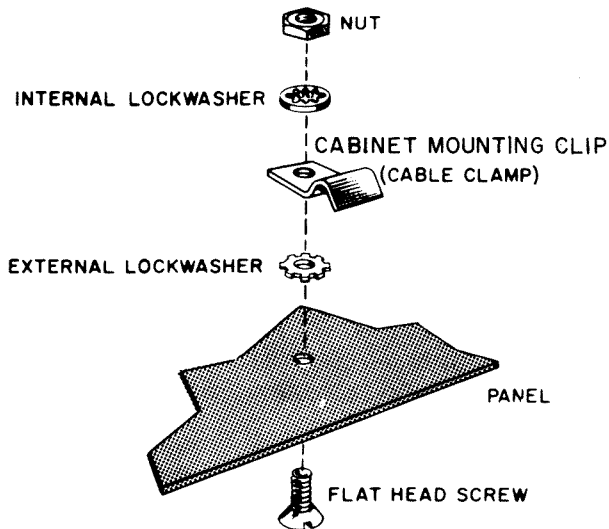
HOW TO ASSEMBLE THE CABINET CLAMP
